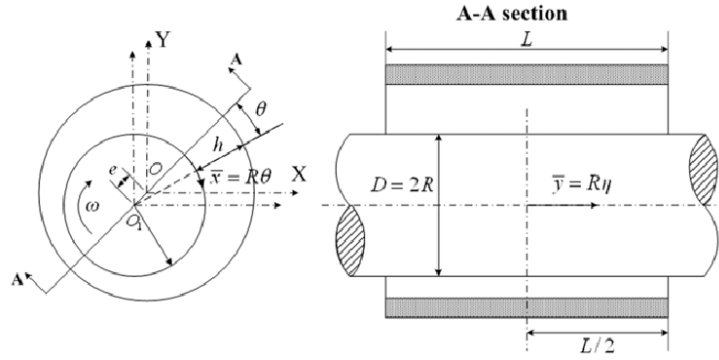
micro-rotor supported by gas-lubricated journal bearing [6]
